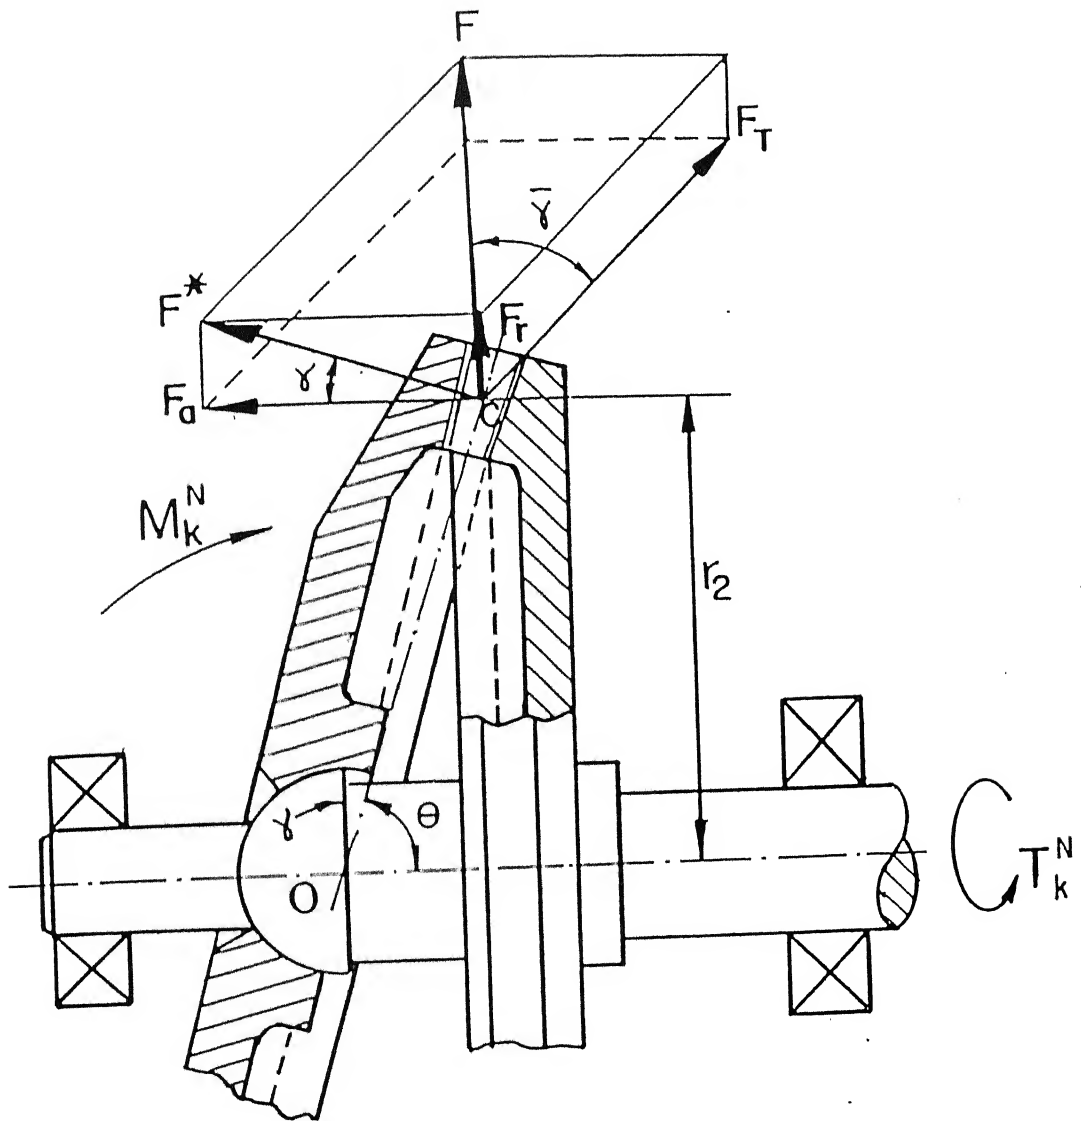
Forces transmitted from the nutating gear to the rotating gear
